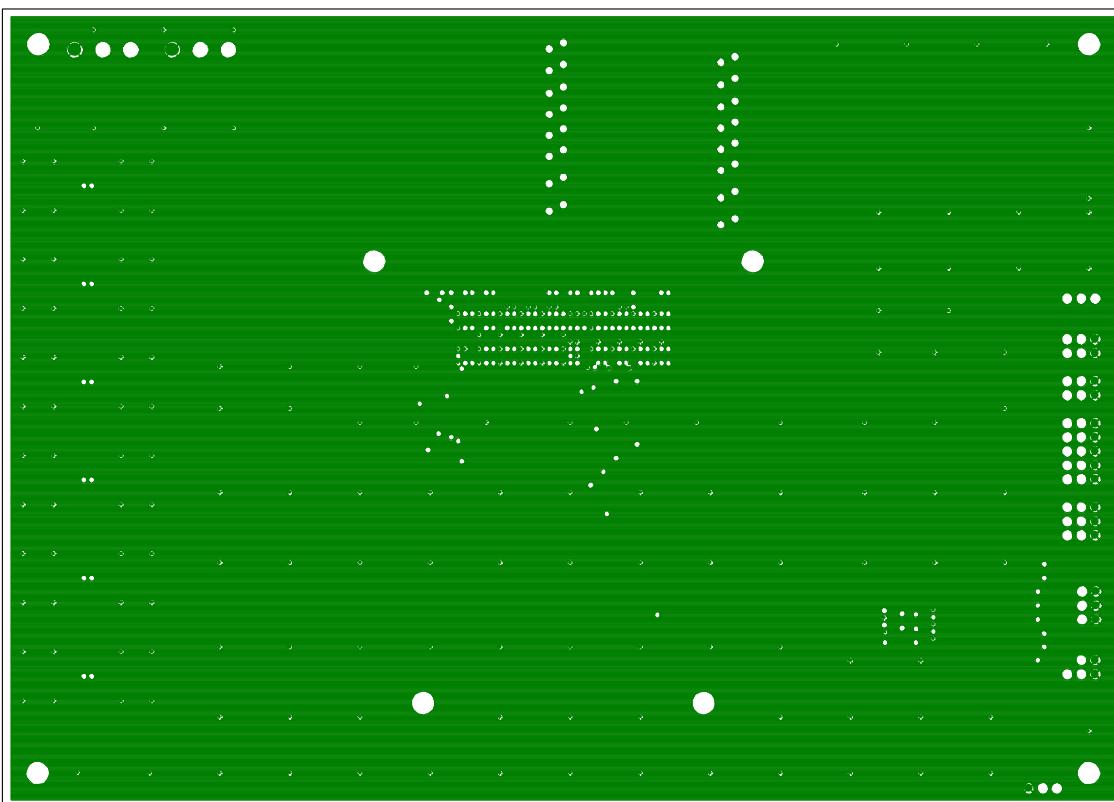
Layer 6—Solder Side (Loopback Motherboard)
